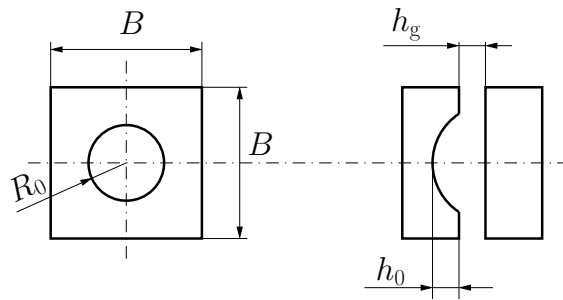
Dimple seal bearing geometry - cases B and C.
